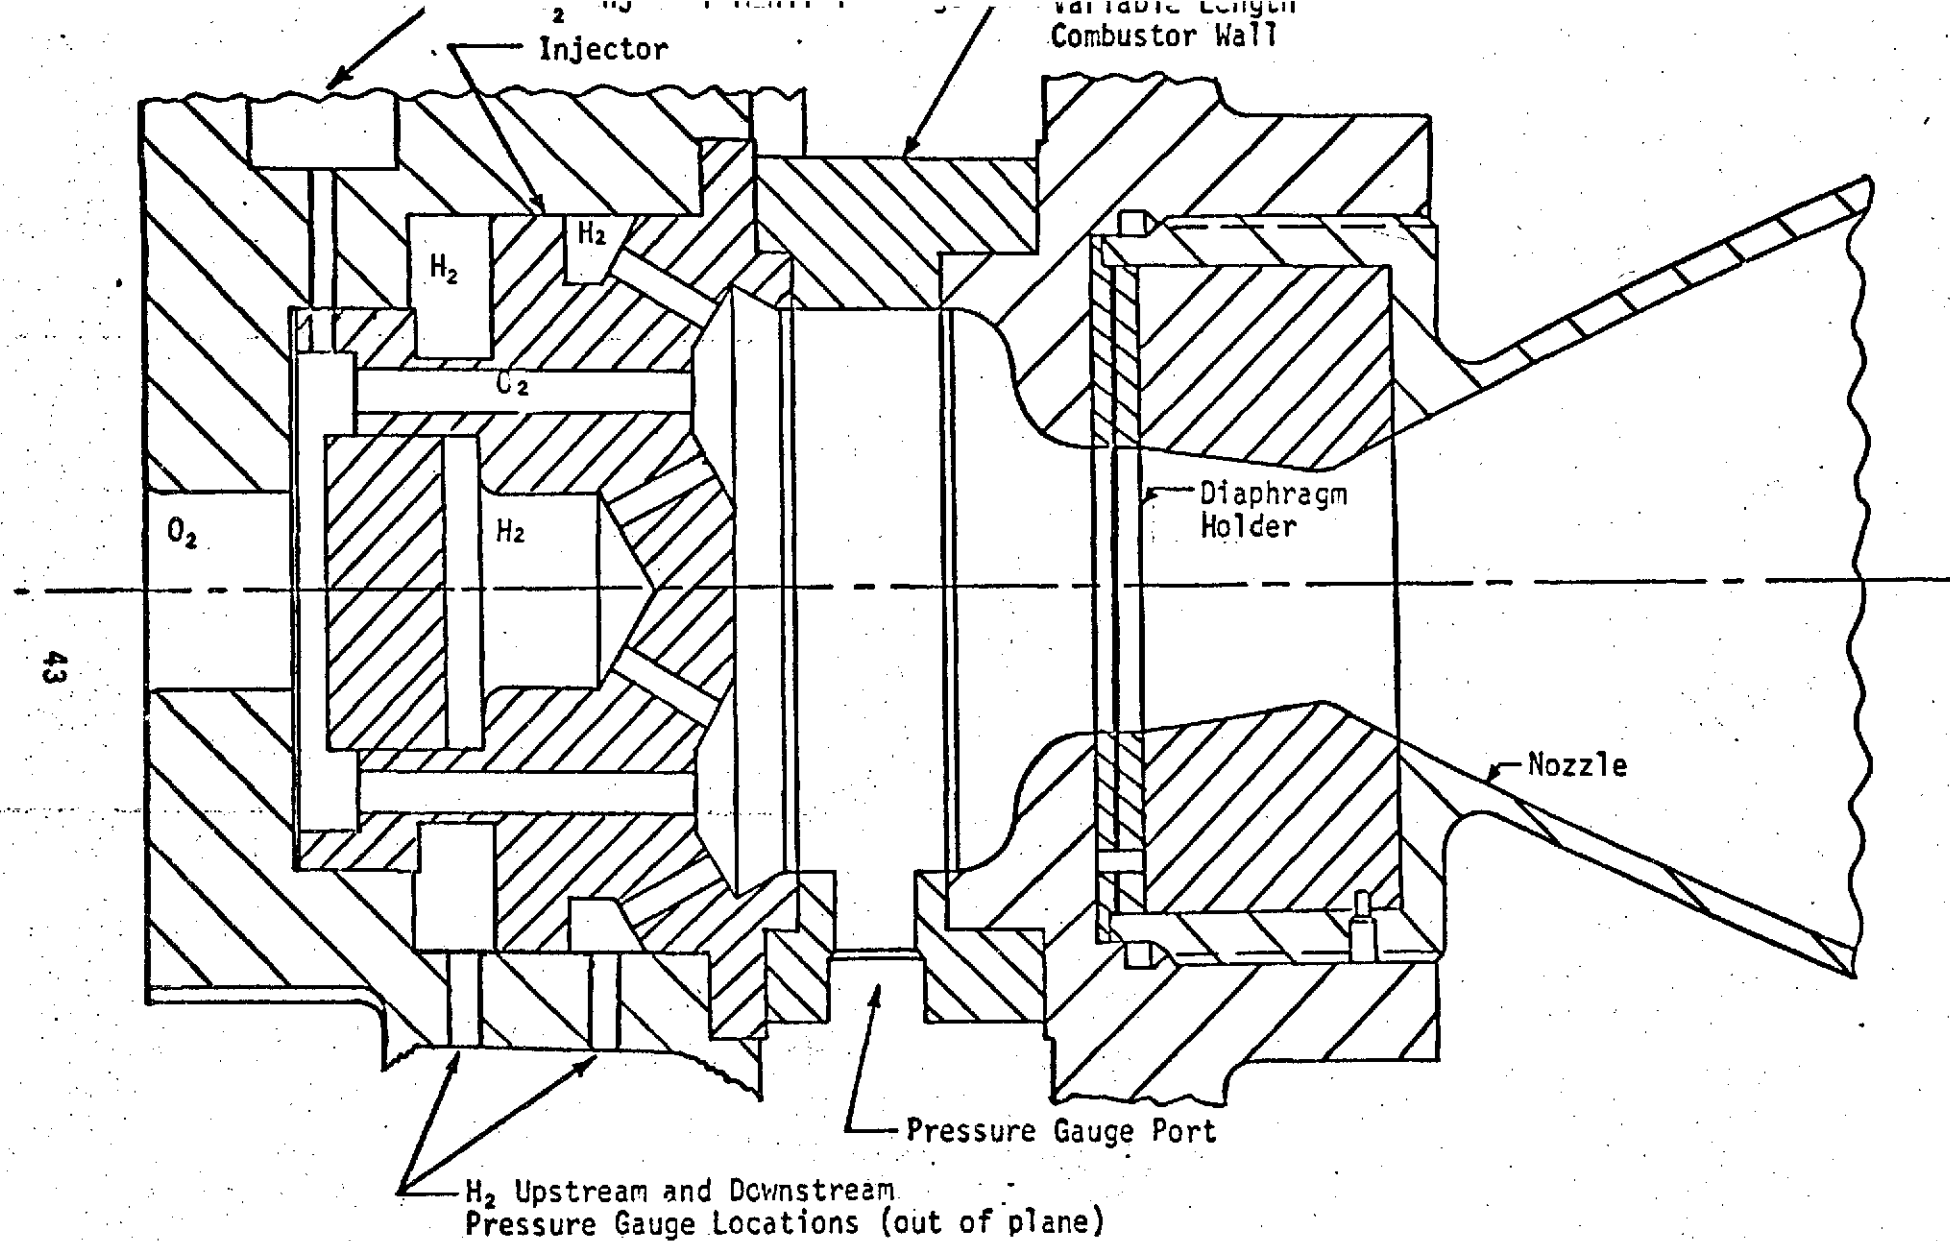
Combustor Assembly,  $L^* = 10$  in., Triplet Injector
